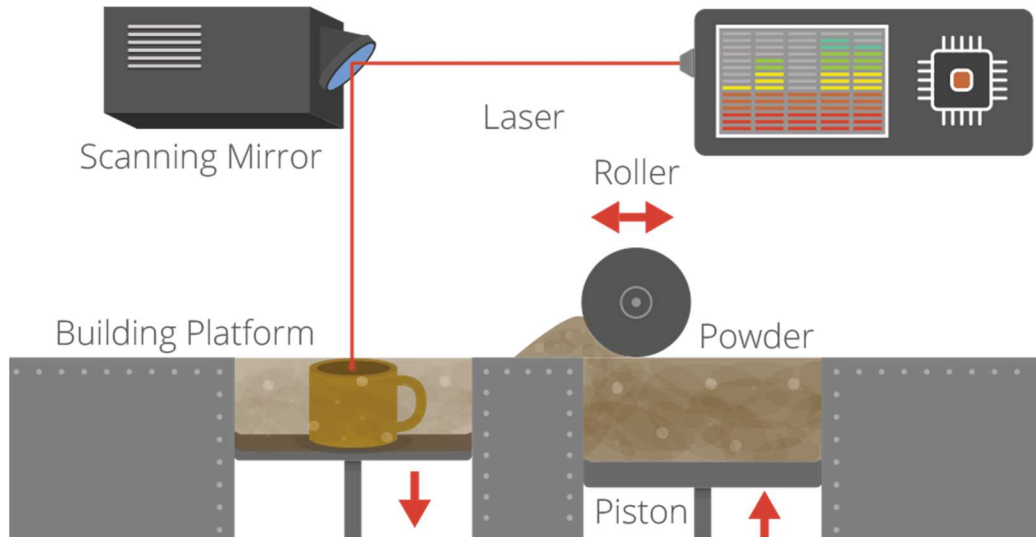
Typical set-up for a selective laser sintering printer which is very similar to the binder jetting printing method shown in Figure 2.1.1 [42].
